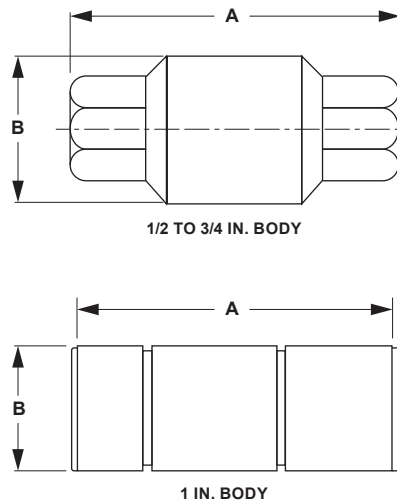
DS200 Series Thermostatic Steam Trap Dimension
